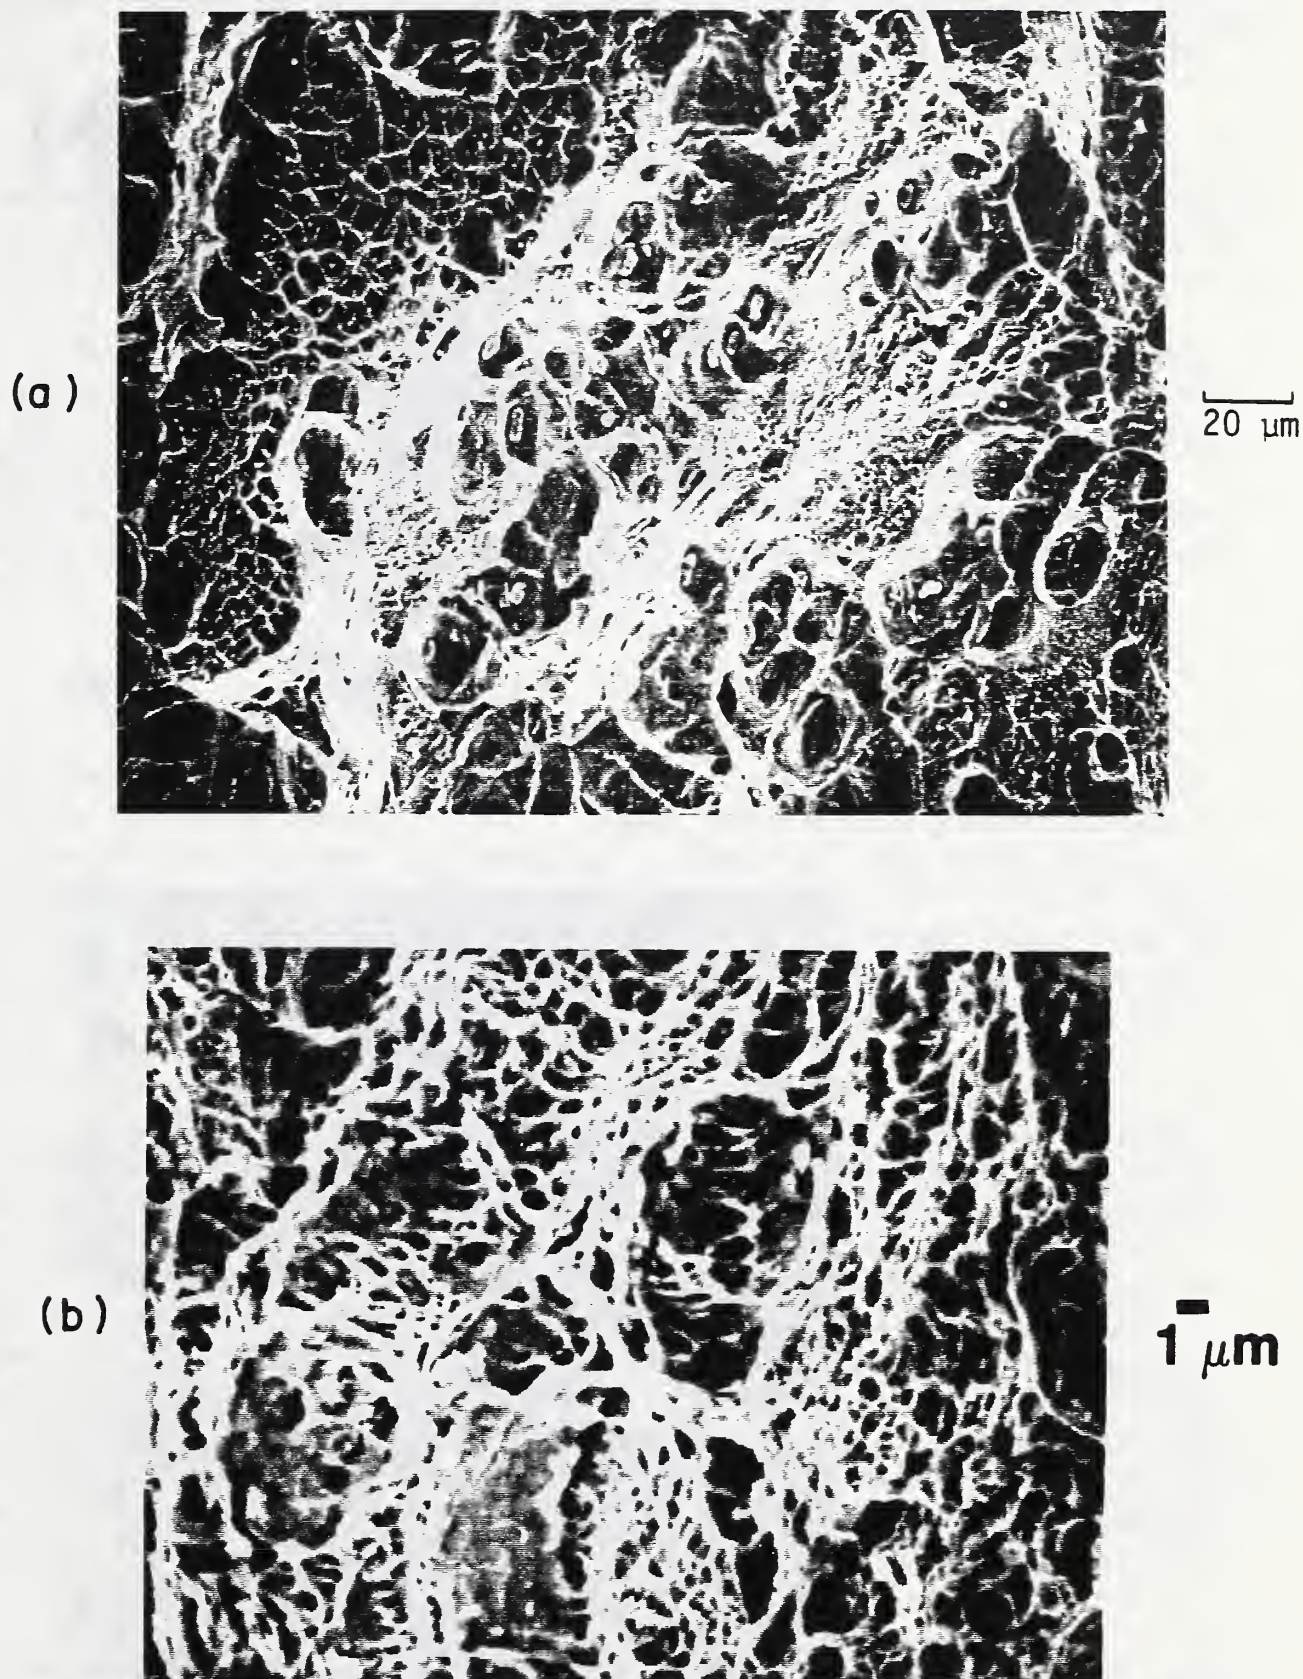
Fracture surfaces from compact specimens (a) alloy #2 tested at 76 K and (b) alloy #3 tested at 233 K.
